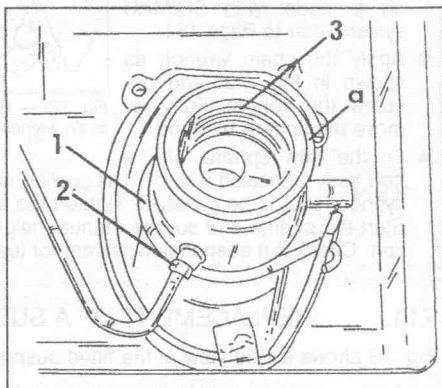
End view of a suspension cylinder after removal of the sphere.
